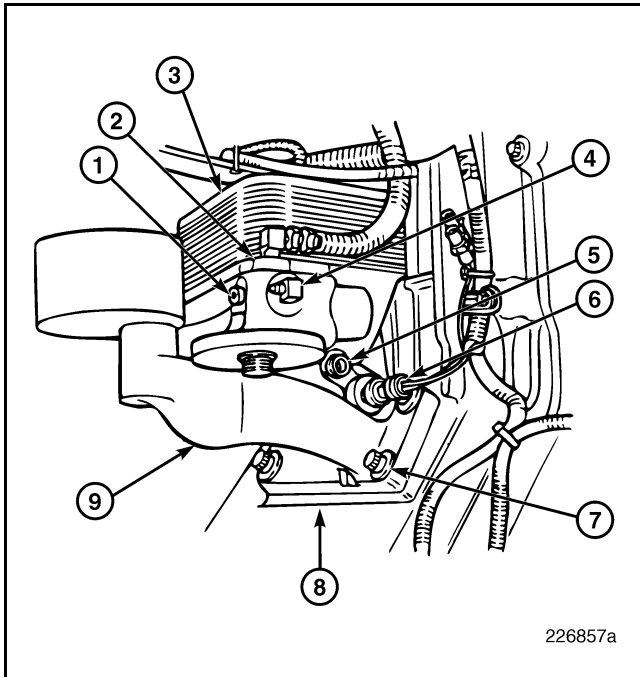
Plate-Type Oil Cooler and Oil Filter Mounting Bracket Removal
